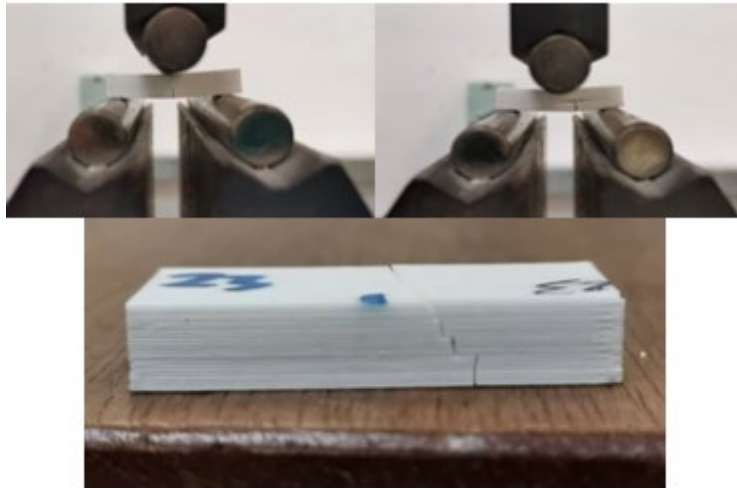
Example of Conducting Three Point Bend Test until Fracture
